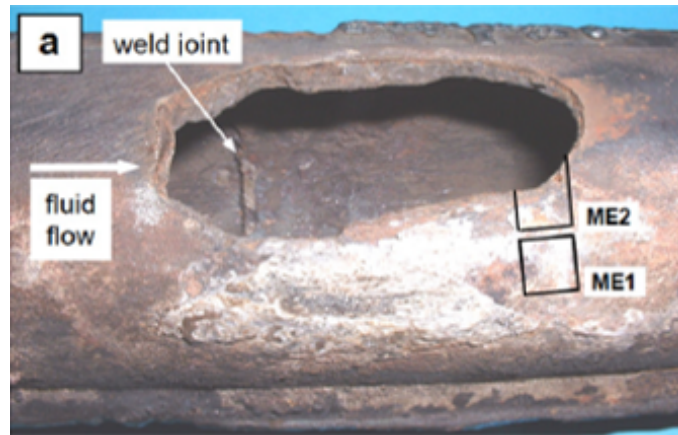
Failure of a boiler tube as part of a power plant, investigated by Djukic et al. [9].
